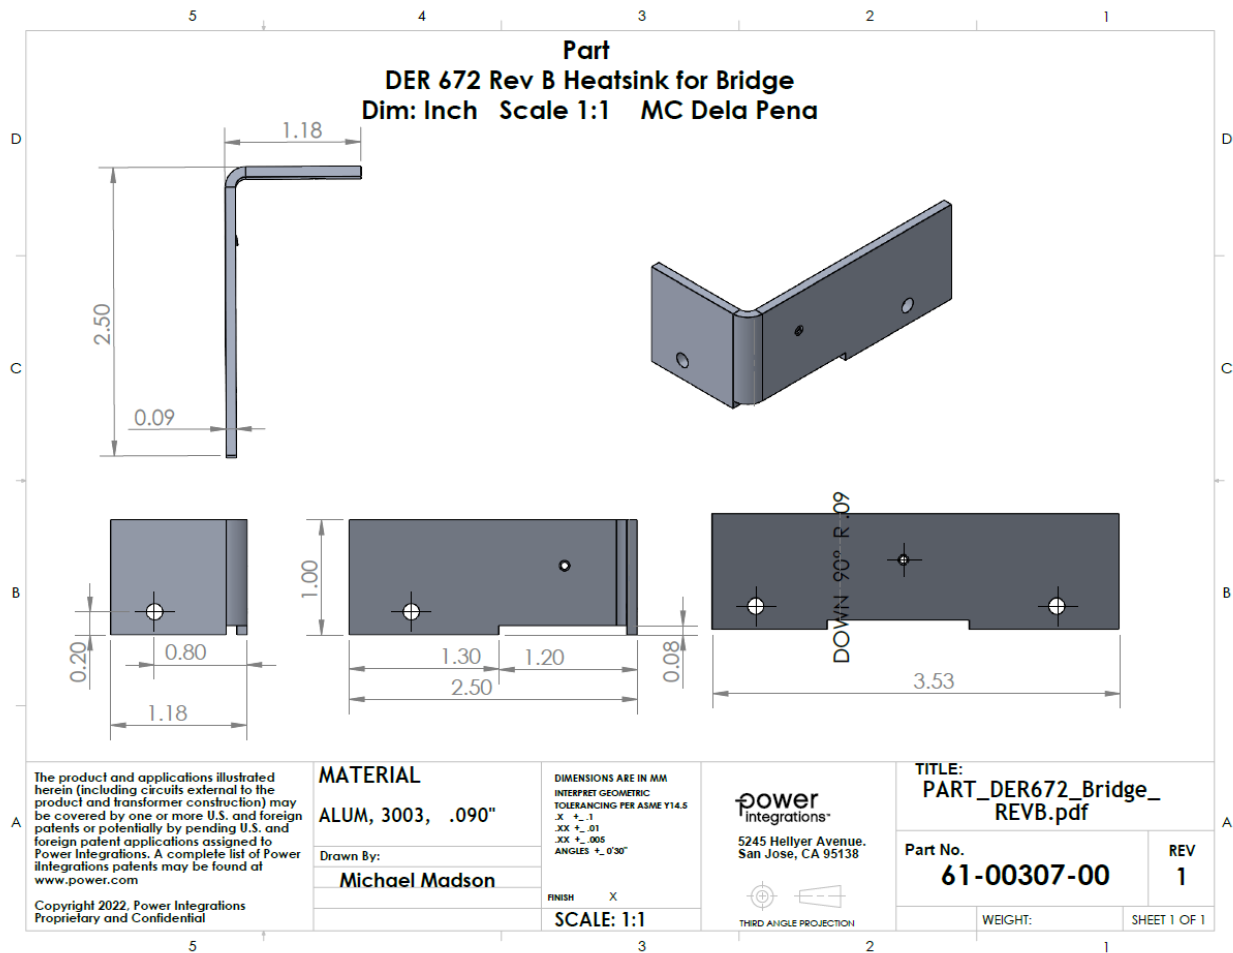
Bridge Heat Sink Sheet Metal Drawing.
